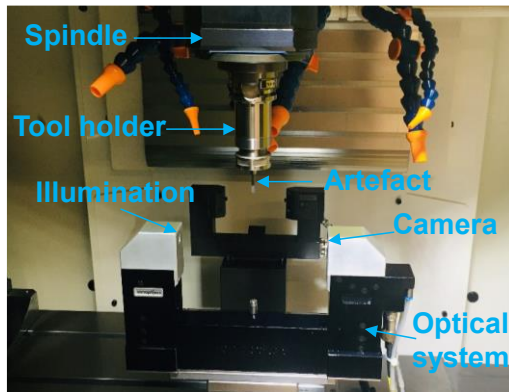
Experimental setup depicting the optical system, artefact mounted on a tool holder and placed in the spindle.
